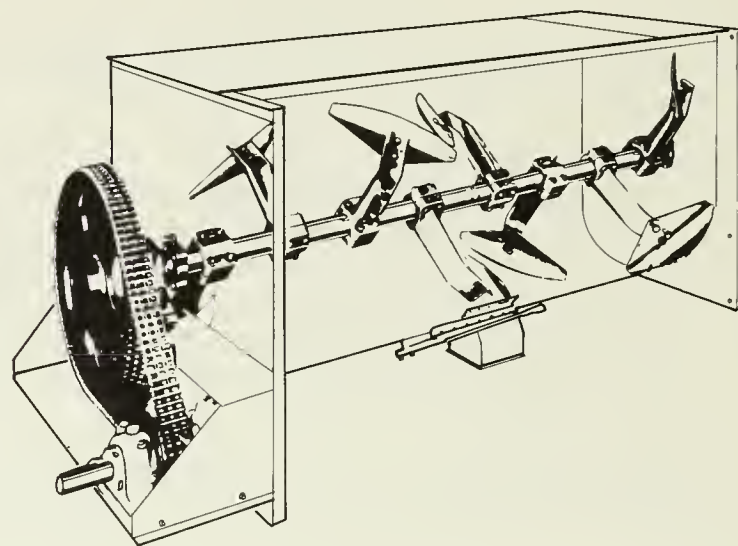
Horizontal batch mixer with paddle blades. Source: Rapids Machinery Co.
